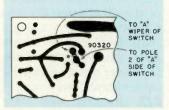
Corner of foil side of control board showing location of foil trace requiring break and wiring for section A side of DPDT switch.
